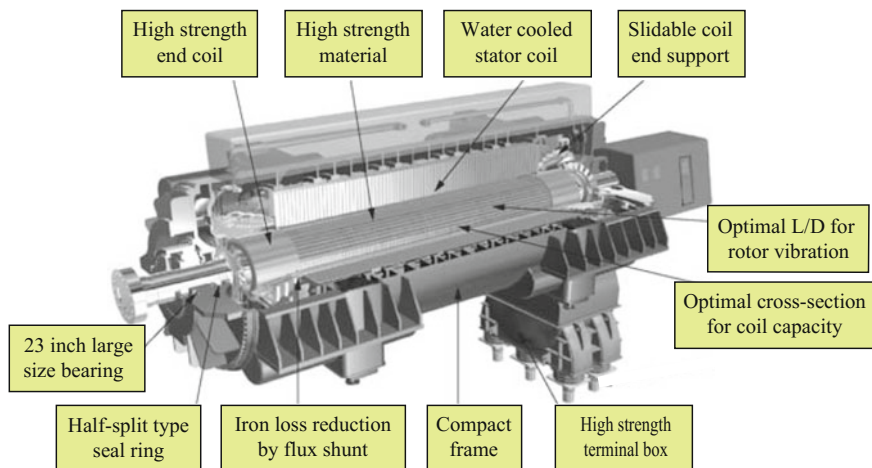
Technical issues for 1000 MW generator development (Ref. Toshiba review)
